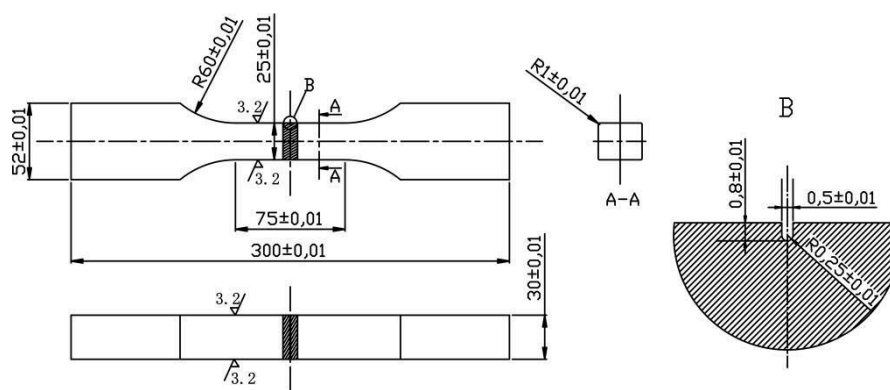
Dimensions of fatigue specimen of welded joint.
